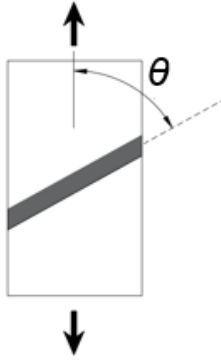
Loading angle on a fillet welded connection.
